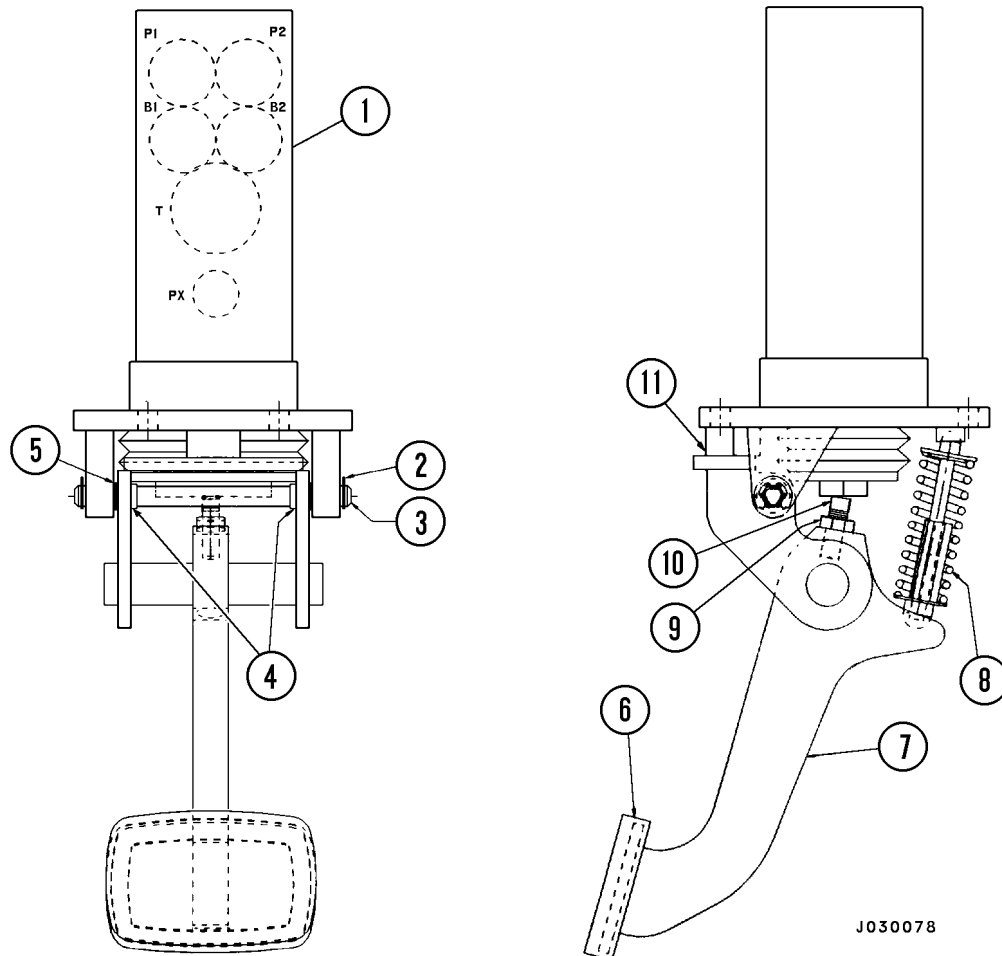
SINGLE PEDAL BRAKE VALVE ASSEMBLY
